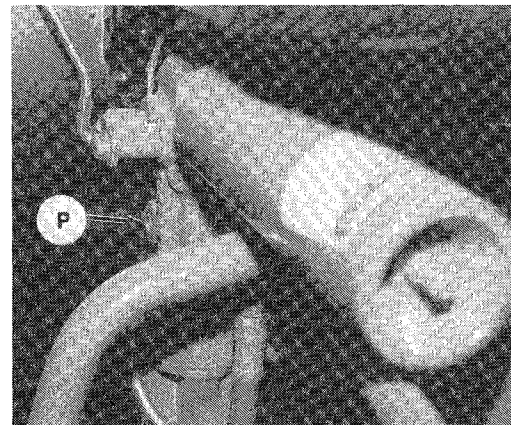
Install a 0-1000 psi (0-7000 kPa) gage in seat control valve test port (P) to check pressure regulator valve setting.
